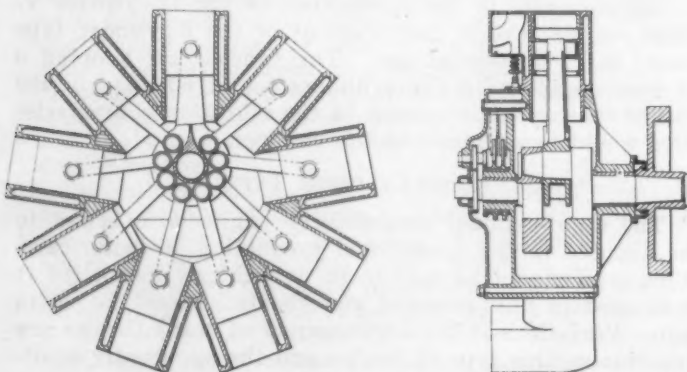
NINE-CYLINDER RADIAL-TYPE ENGINE
